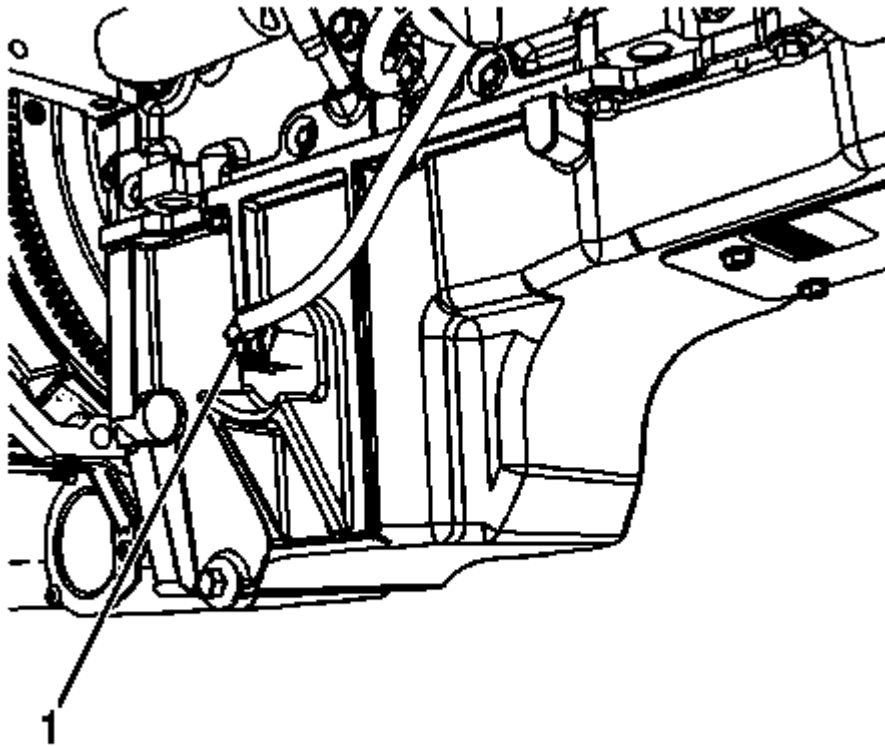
Engine Harness Electrical Connector And Oil Level Sensor
